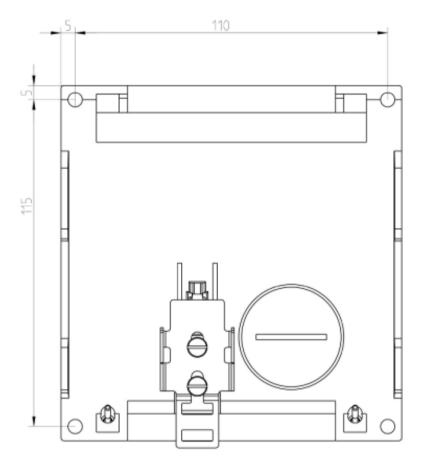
Medium design dimension drawing (IE Switch X-300)
